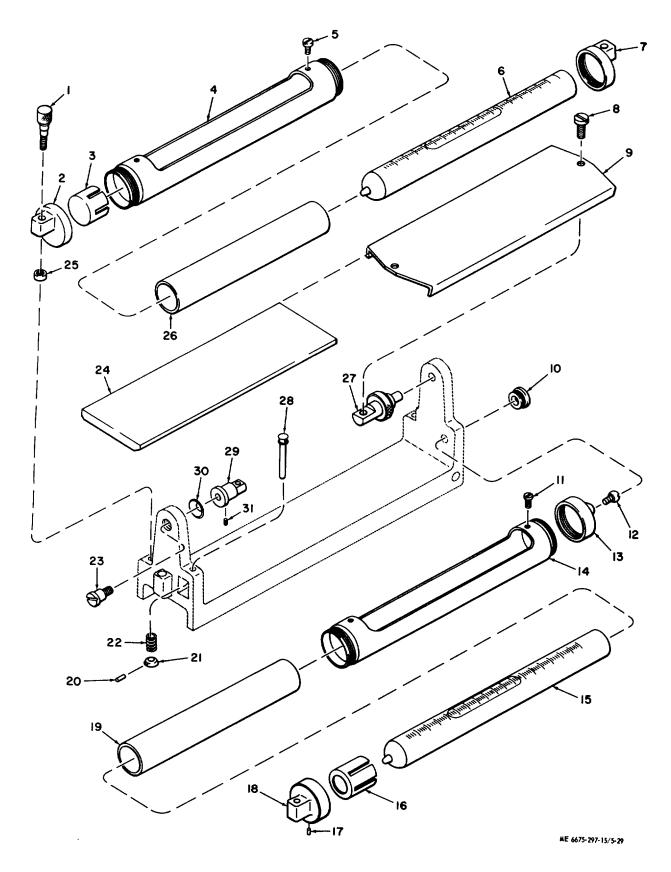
Horrebow-Talcott level assembly, disassembly and reassembly.
